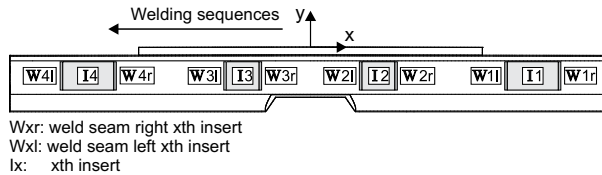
Welds classification of the crossbeam welded assembly
